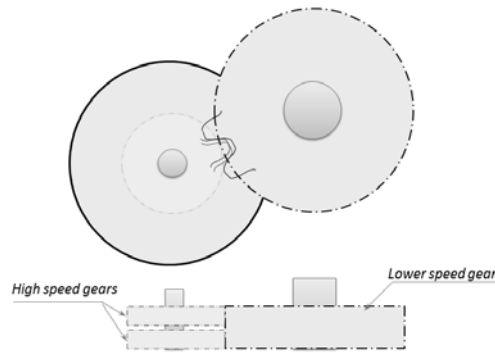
An improved design of the gear pair for eliminating the gear clearance
